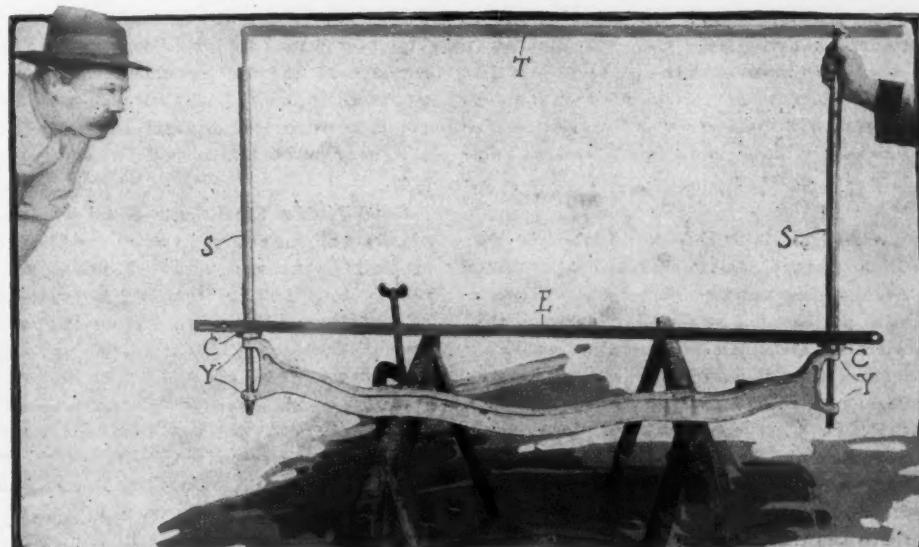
EQUIPMENT FOR TESTING FRONT MOTOR CAR AXLES
